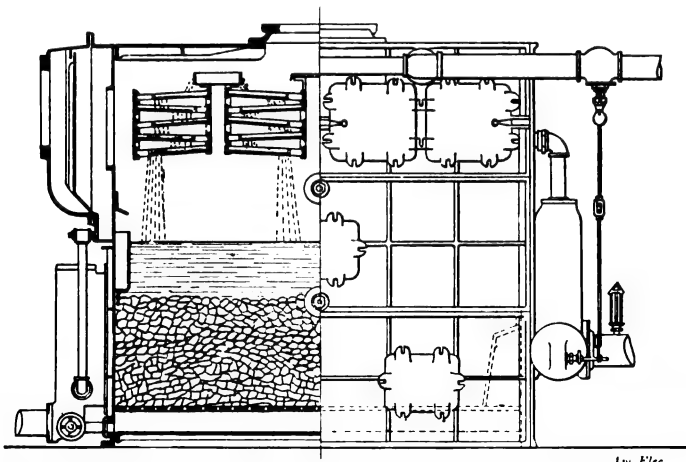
HALF SECTION AND FRONT ELEVATION OF OPEN FEED-WATER HEATER, SHOWING TRAY AND CLEAN-OUT DOORS.
